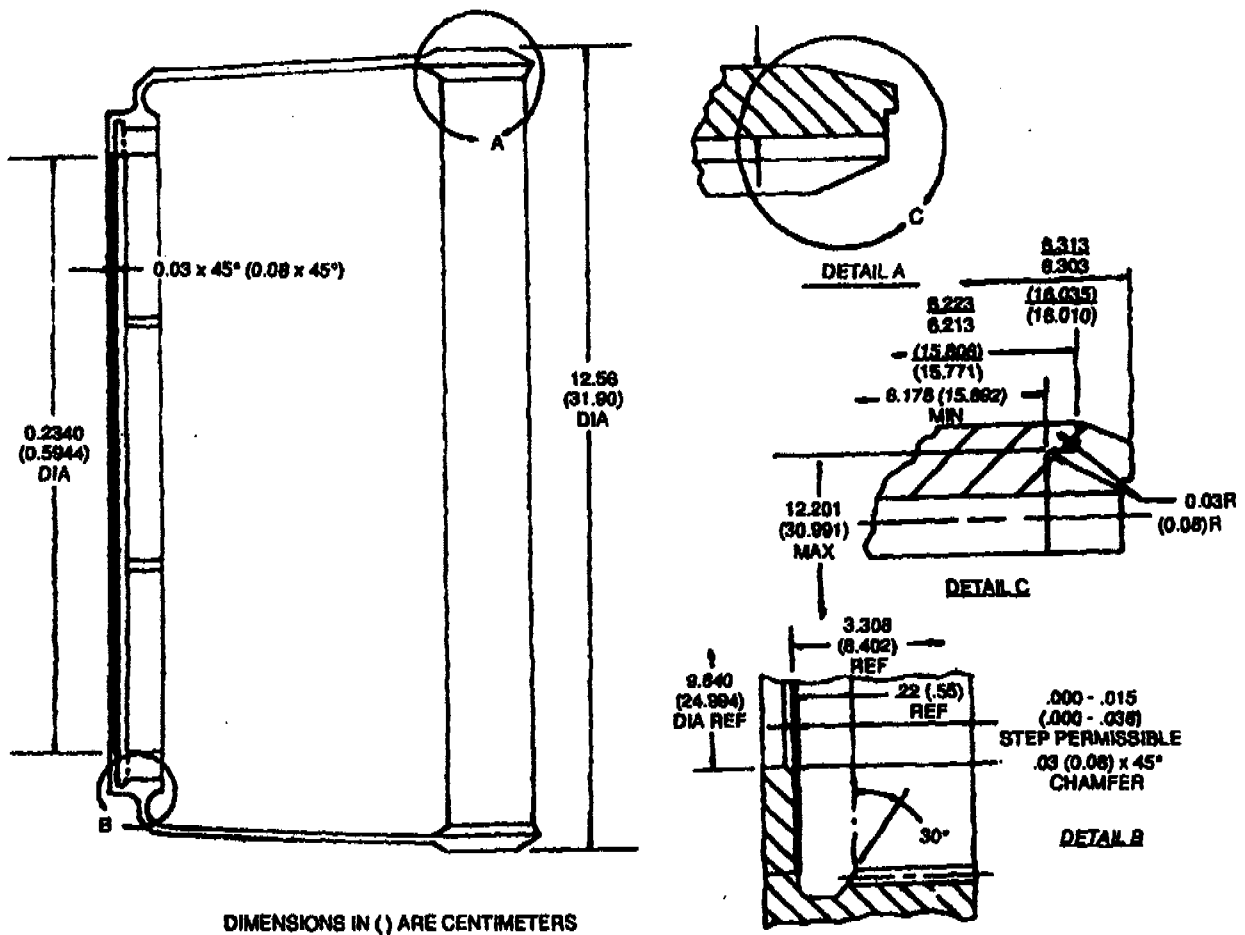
Secondary Ring Gear- Repair Area (T53-L-701, -701A).
